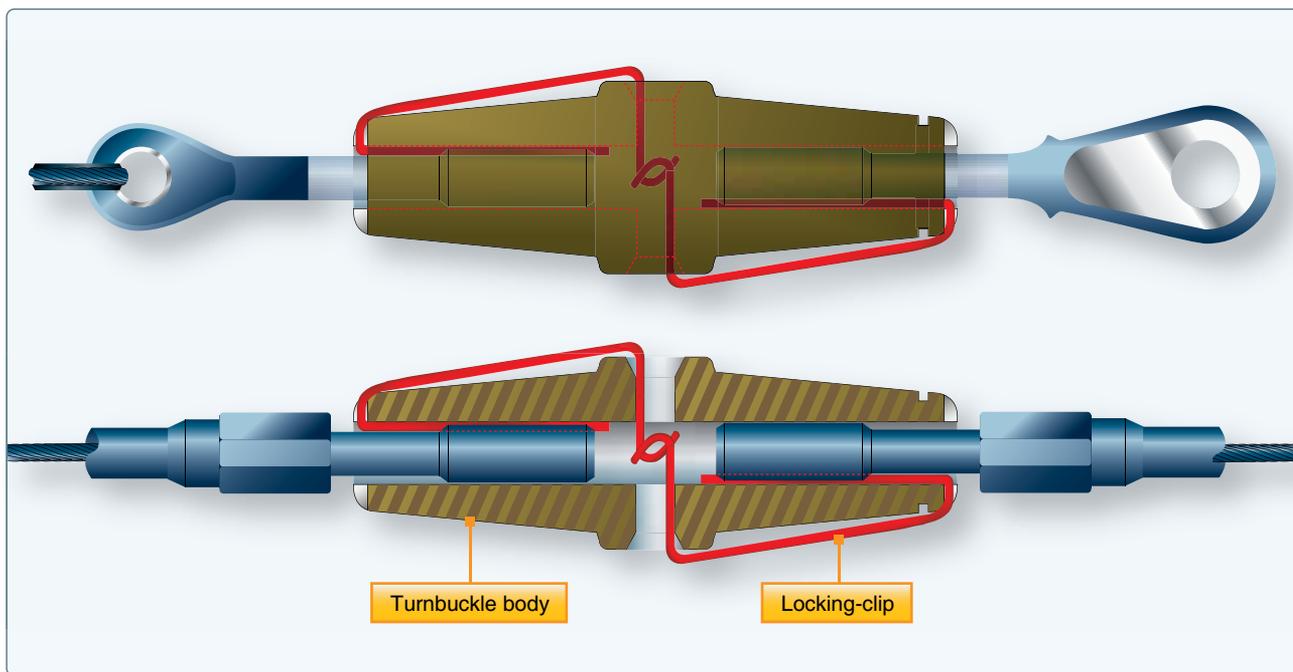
Clip-type locking device and assembling in turnbuckle.
